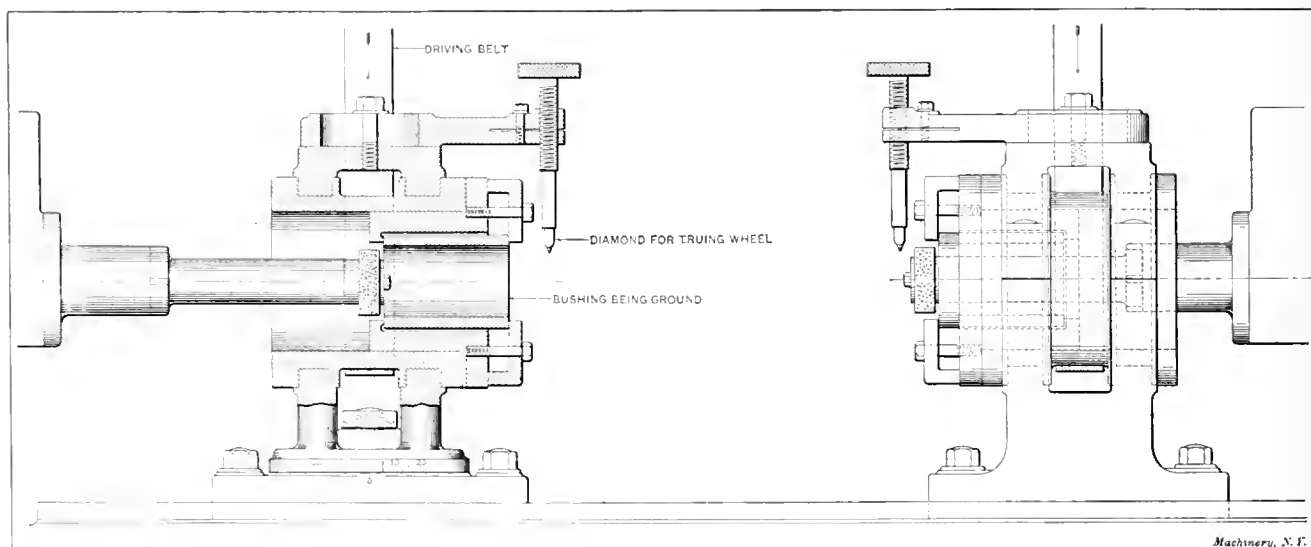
Section and Elevation of Head-stocks and Work and Relation of Head-stocks to the Grinding Wheels
